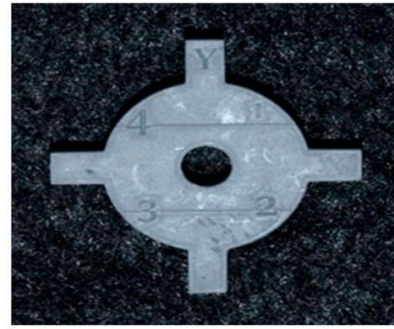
Completed calibration coupon printed using Grey V4 resin for dental models (Formlabs, Somerville, MA, USA).
